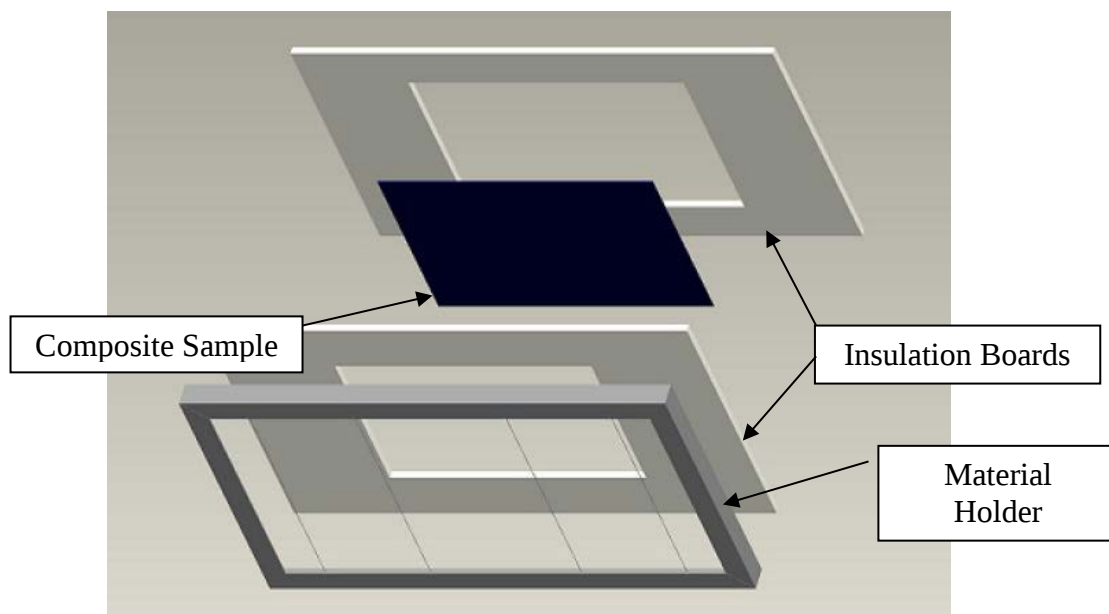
Exploded View of Composite Sample, Insulation Boards, and Material Holder
